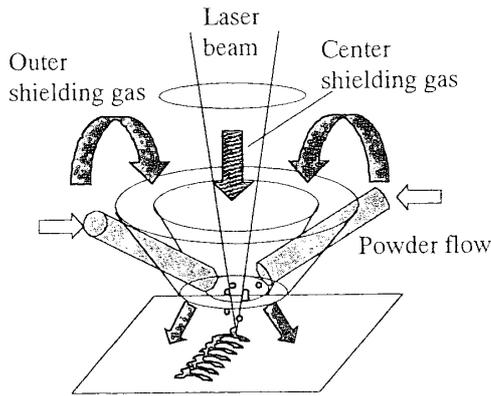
schematic drawing of the coaxial nozzle for multi layer laser cladding
